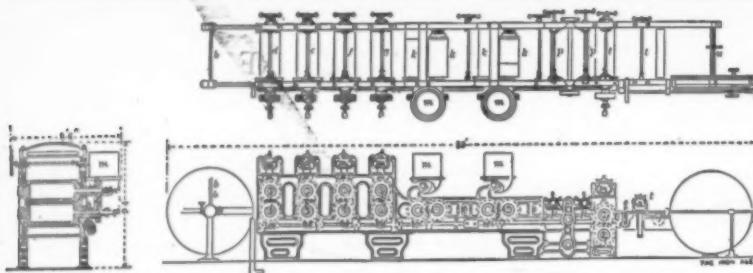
Elevations and Front View of the Smith Fabric Treating Machine.
